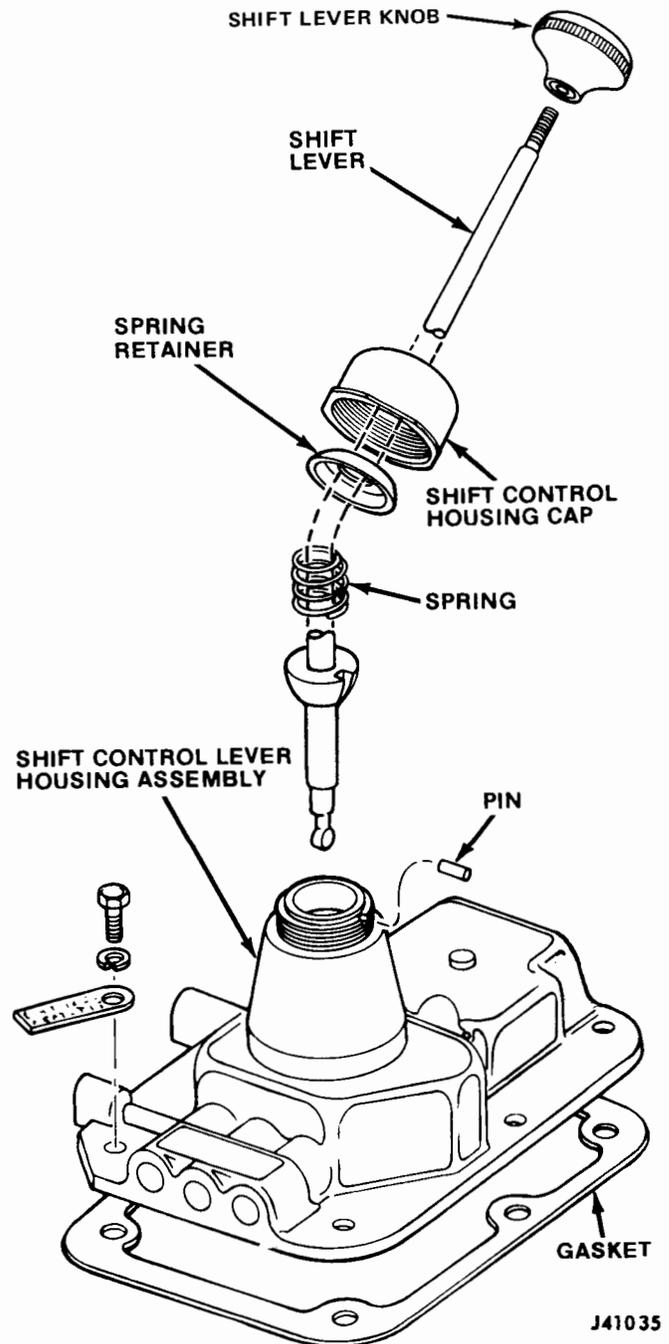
Shift Control Lever Housing Assembly Removal—4-Speed Transmission
